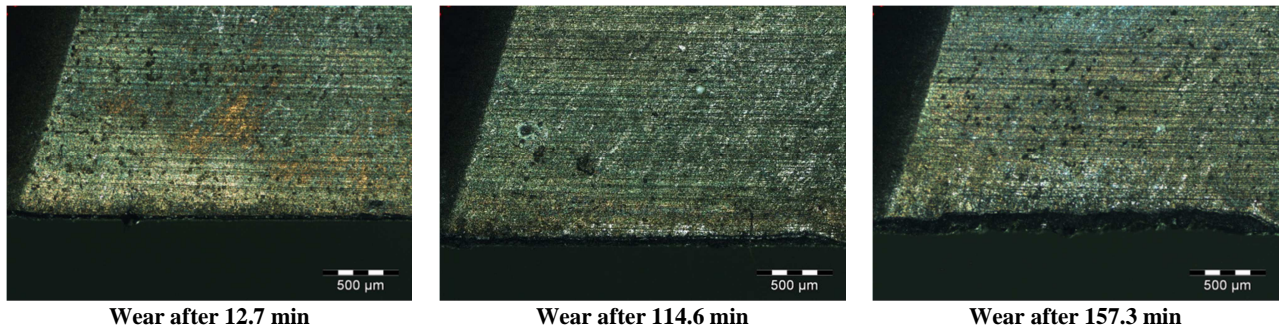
Wear scar progression for magneto-abrasive machining coating treatment under air blow cooling (dry cutting) conditions, machining Ti6Al4V with SECO inserts
